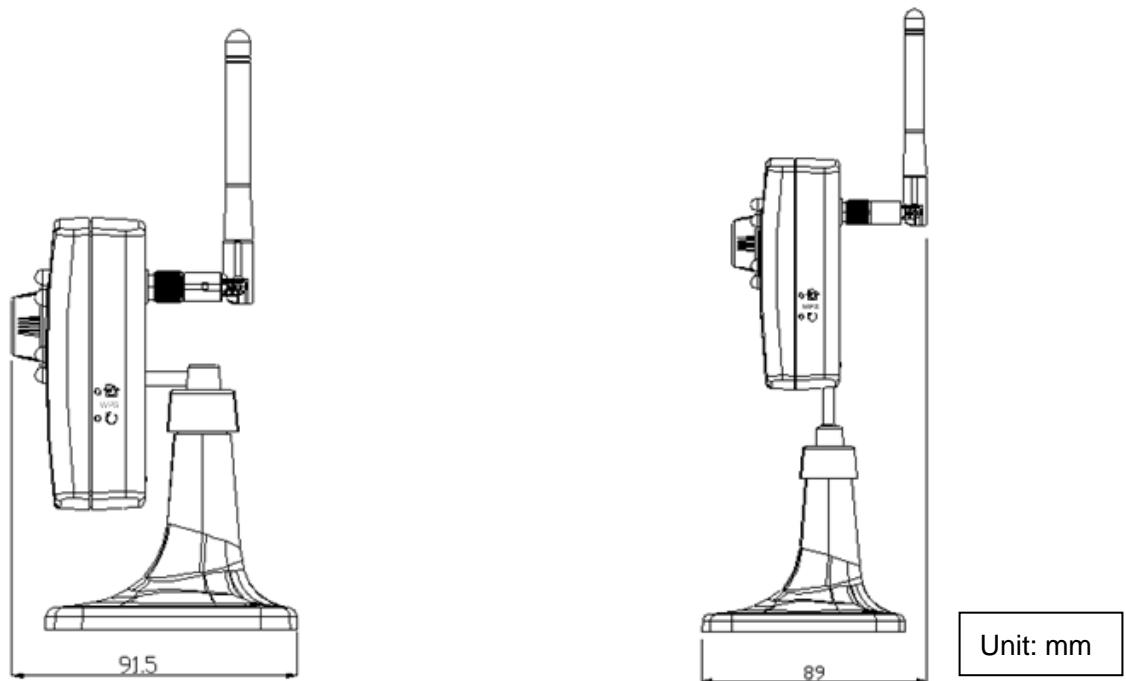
ACCESSORY ASSEMBLY SIDE VIEW
